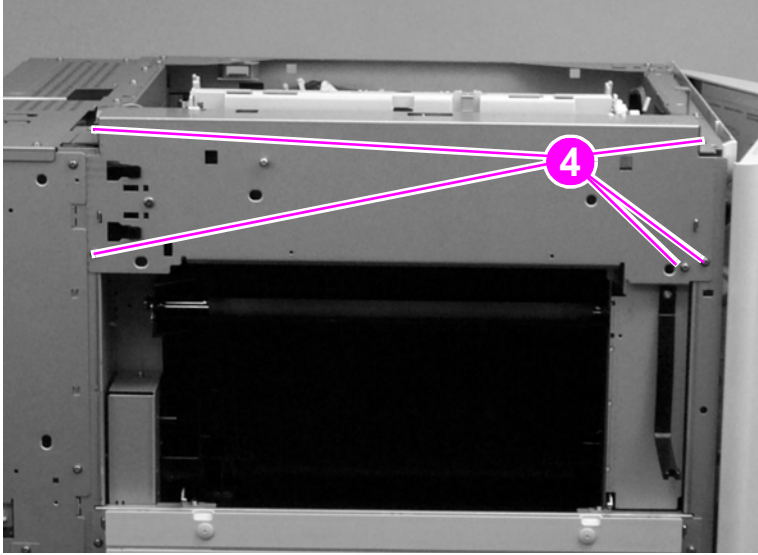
Remove the delivery unit mounting screws (1 of 2)
